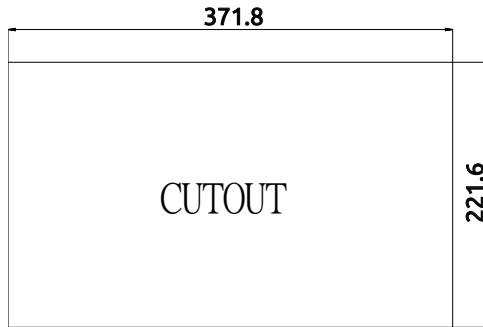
SP2-15WP-AL Cutout Dimensions
